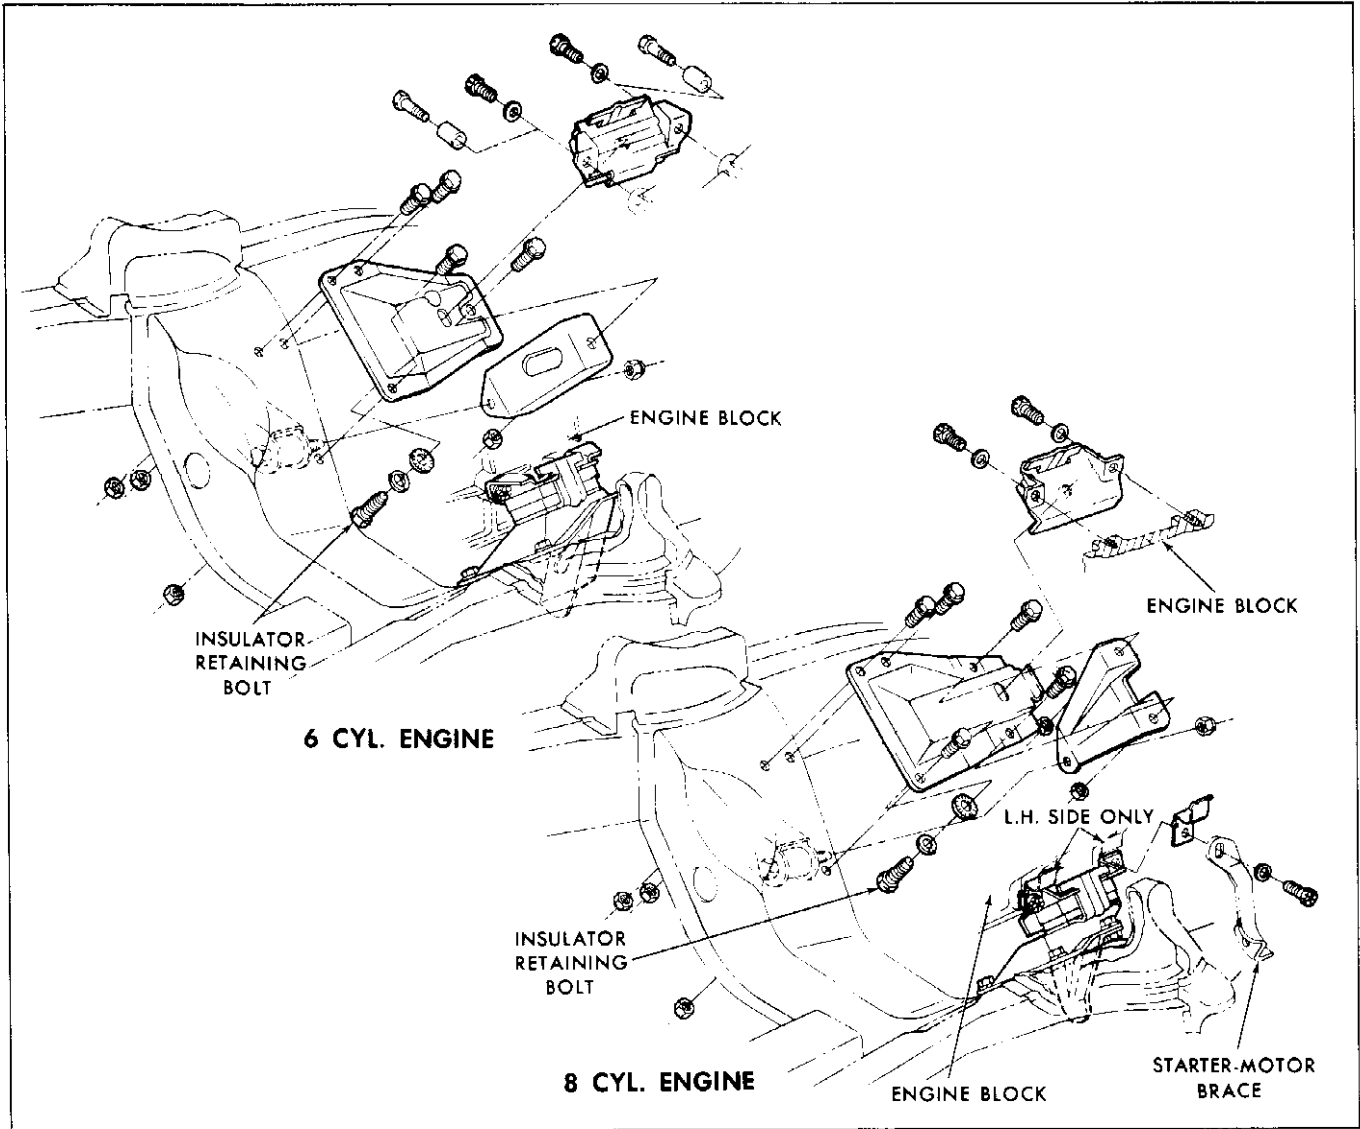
Engine Insulators - 6 Cyl. and 8 Cyl.
